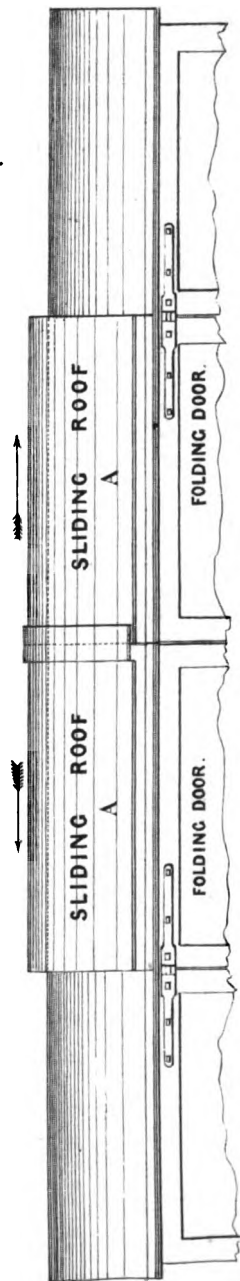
Waggon with Double Slides in Roof, and Folding Doors.
